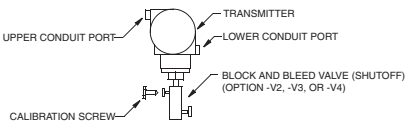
Mounting of Transmitter with Threaded Type Pulp and Paper Process Connection
